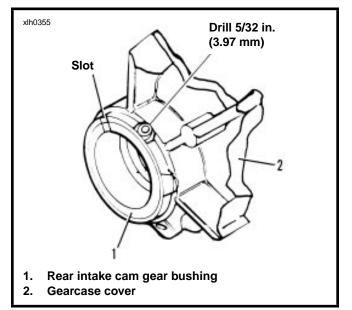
Rear Intake Cam Gear Bushing Installed in Gearcase Cover
